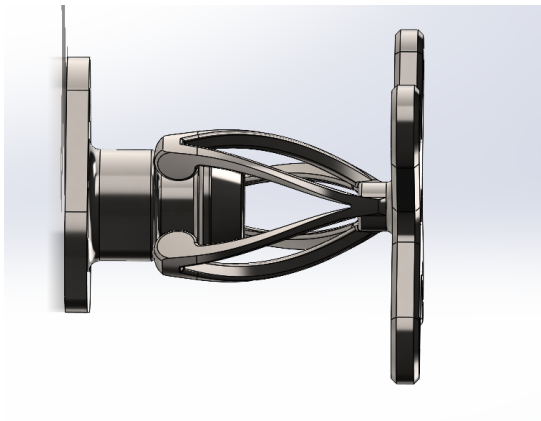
Locking mechanism detailed views: showing engagement geometry.
